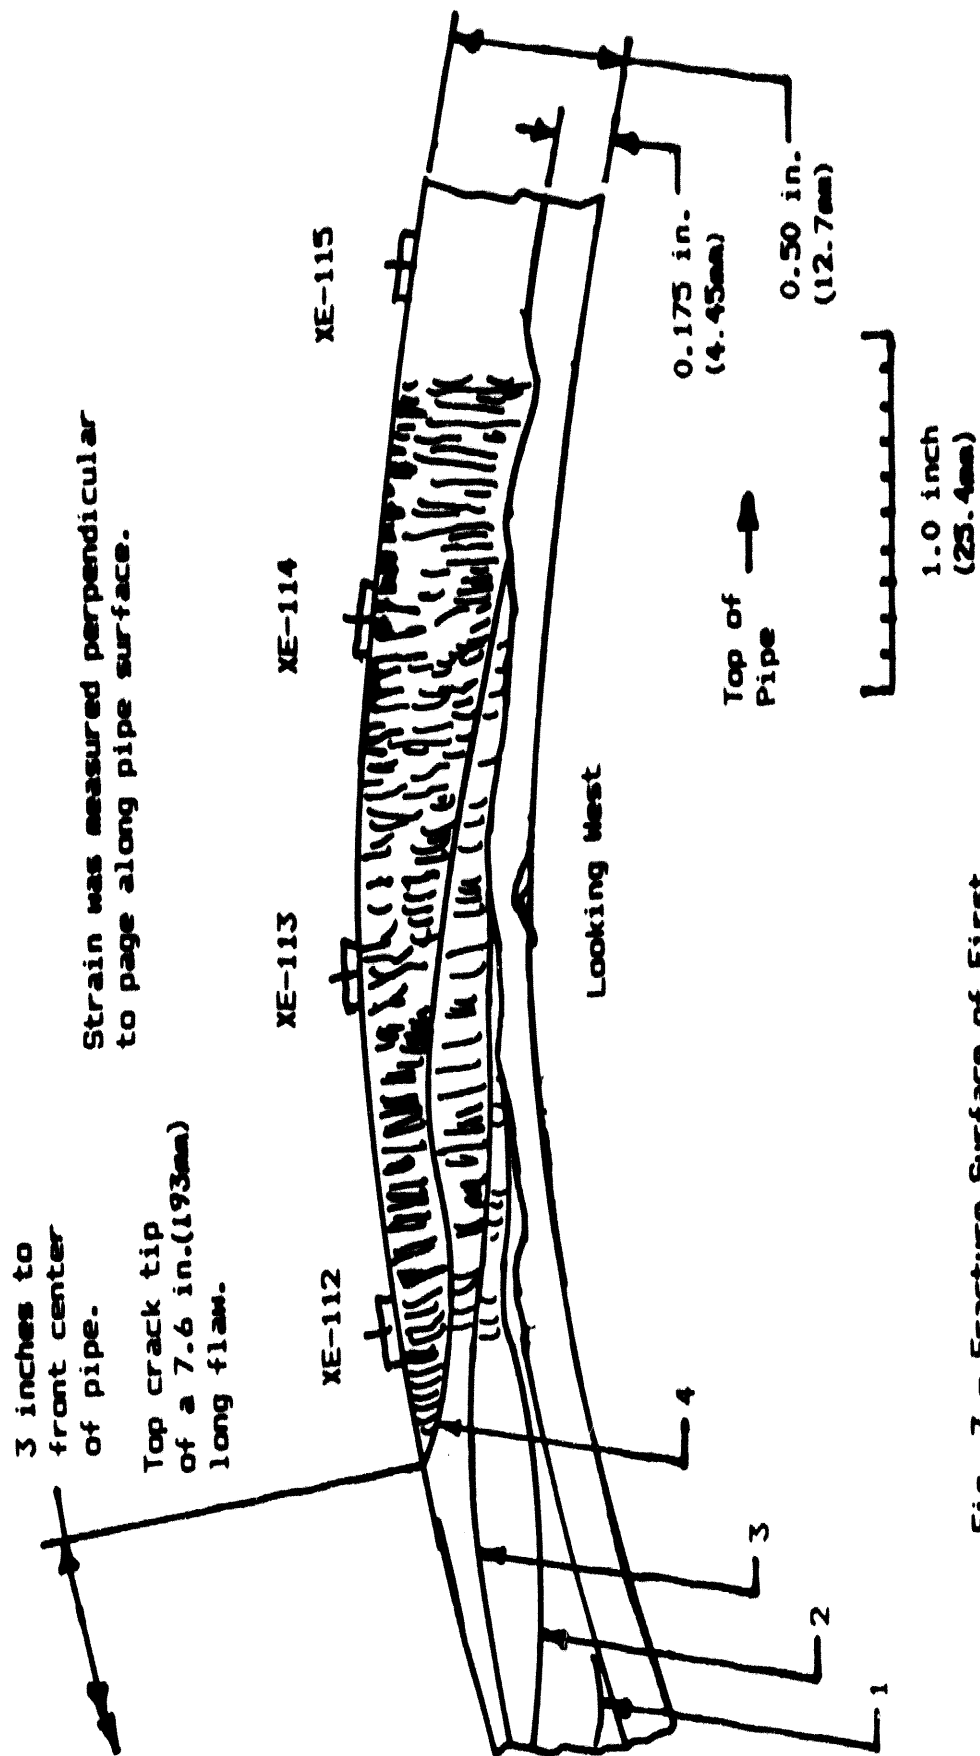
Fracture Surface of First Test Pipe
